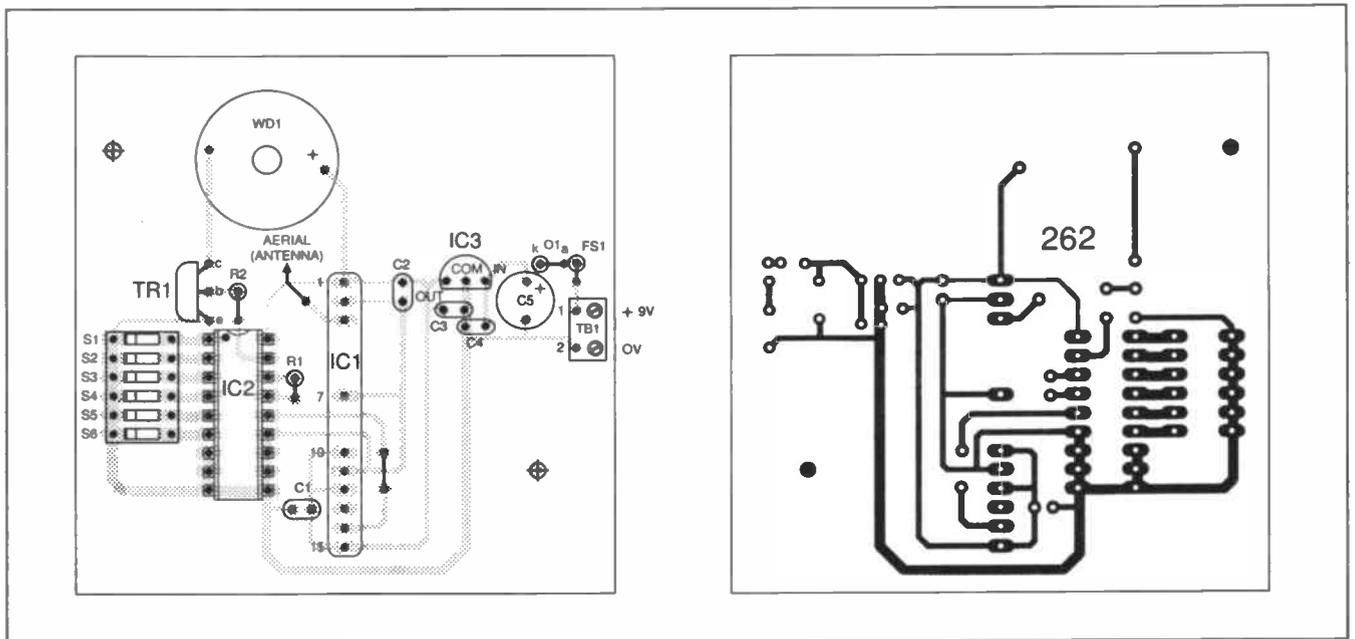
Printed circuit board component layout and full size copper foil track master for the Receiver.
